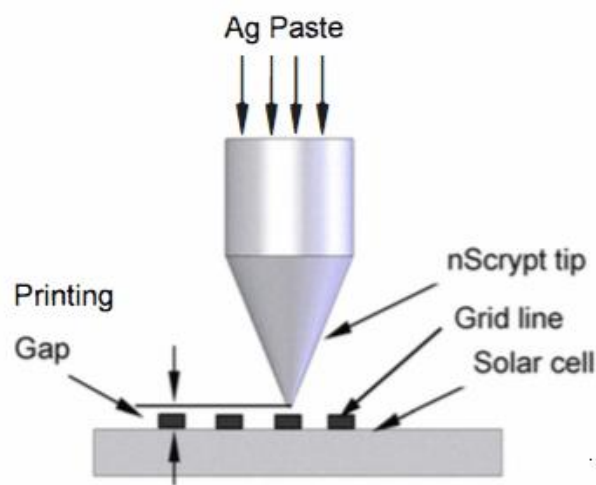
Front view of non-contact micro-dispensing nozzle printing paste on a Si solar cell (from [105]).
